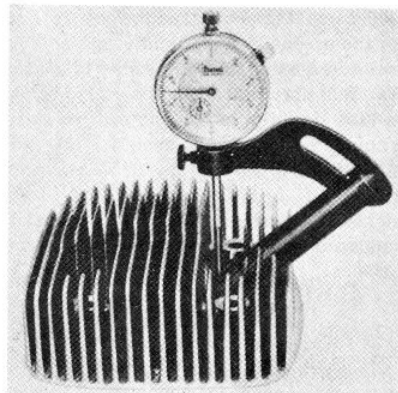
Special dial indicators are available as shown for measuring piston travel in angled spark plug holes.
